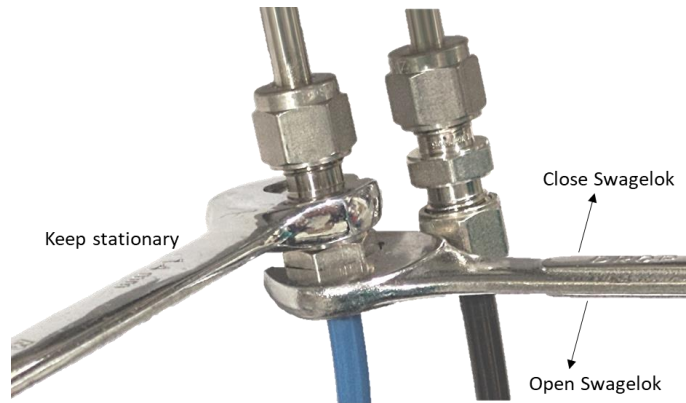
Image showing how to connect and secure the Swagelok connectors.
